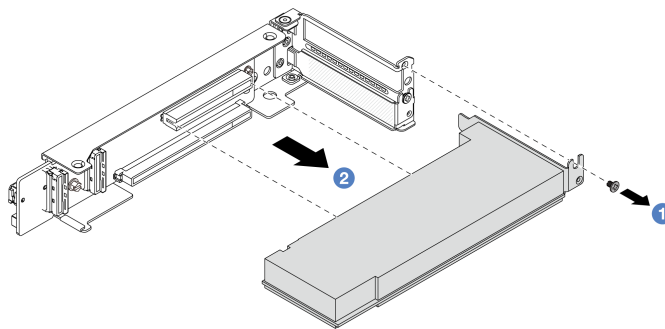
Removing a PCIe adapter from the 4LP riser 3/4 assembly
